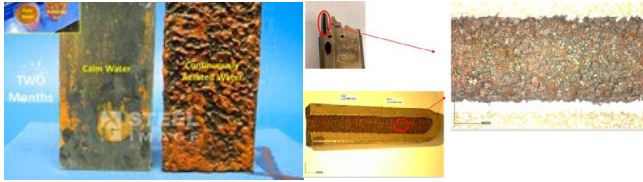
The rough printed, downward facing cooling surface along with continuously aerated water leads to excessive corrosion on the internal cooling lines.
